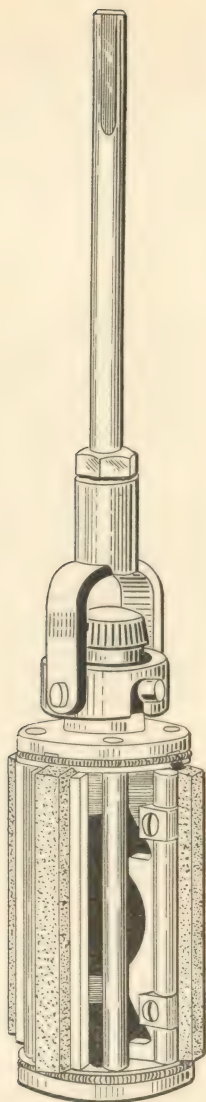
TYPICAL ADJUSTABLE CYLINDER HONE
